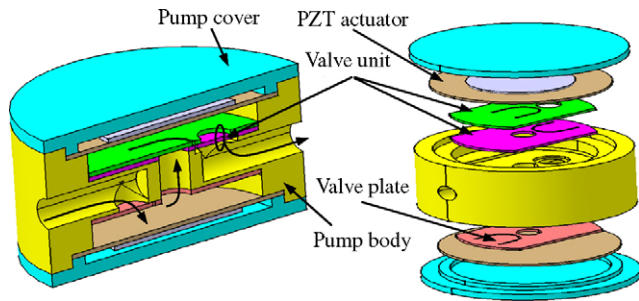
Assembly structure of the 2-chamber piezoelectric pump.
